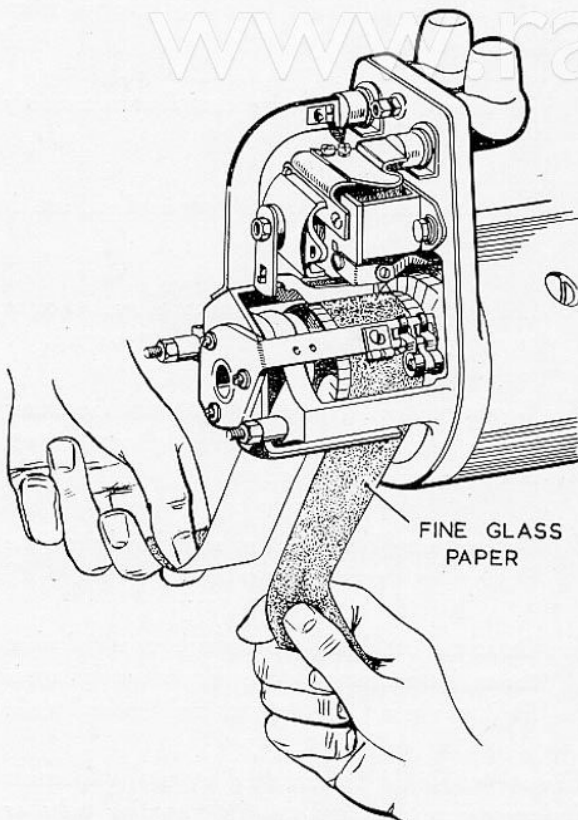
BEDDING STARTER MOTOR BRUSHES
